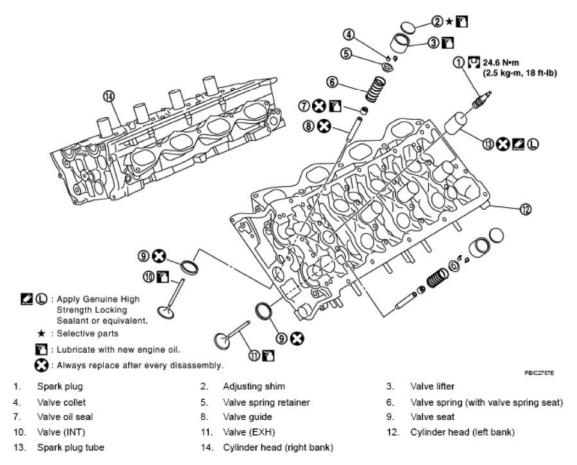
Identifying Cylinder Head Components And Torque Specification
